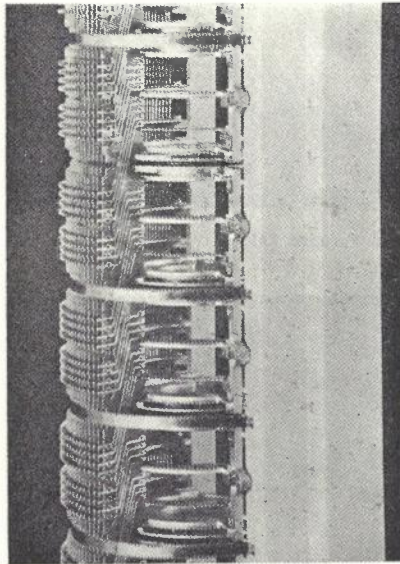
Partly Equipped Solderless Bank Multiple for E.M.D. Switches.
